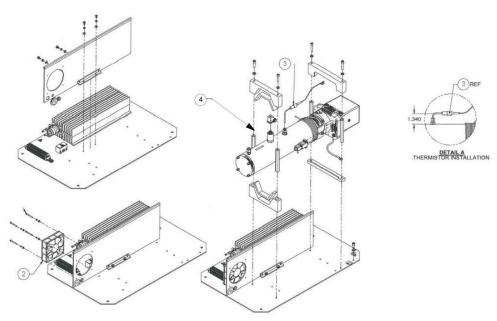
8/28 m sample cell panel assembly parts (Continued)
